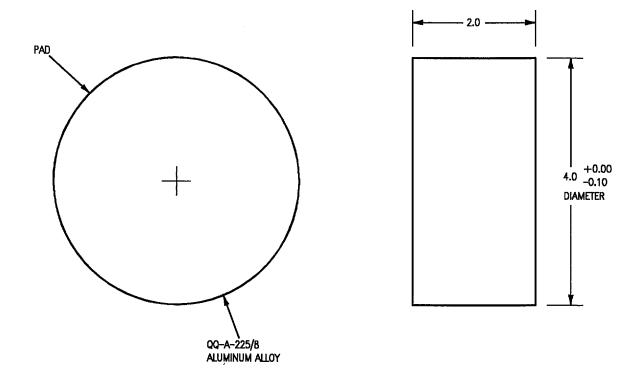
Inboard Pylon Lower Bushing Removal (Sheet 1)
